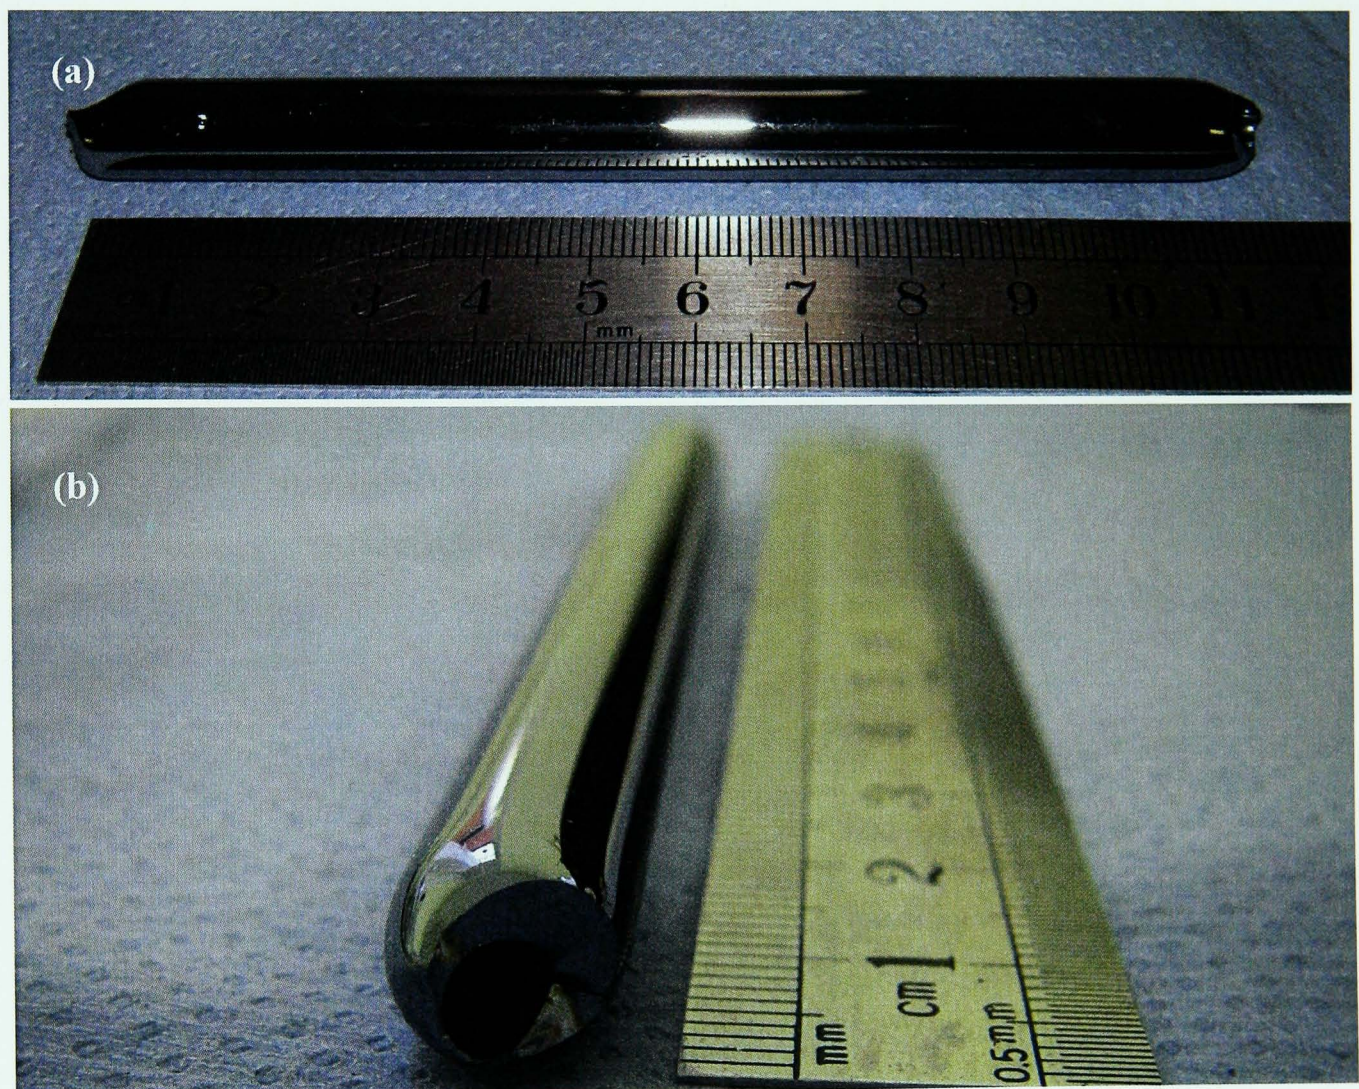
RC003 rotational casted jacket tube. (a) The size of RC003 was 115.0 mm length and (b) 5 / 10 mm ID / OD. One glass piece was chipped off during ampoule opening, so the end of the RC003 was not round in shape.
